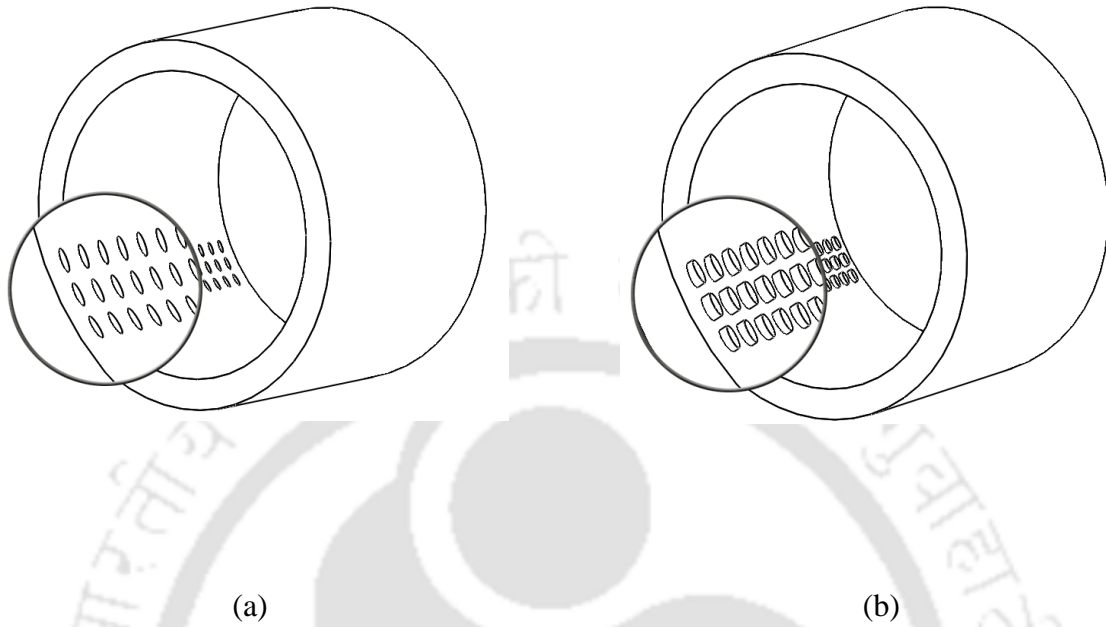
Elliptical textured journal bearing: (a) Outside dimples (negative) (b) Inside dimples (positive)
